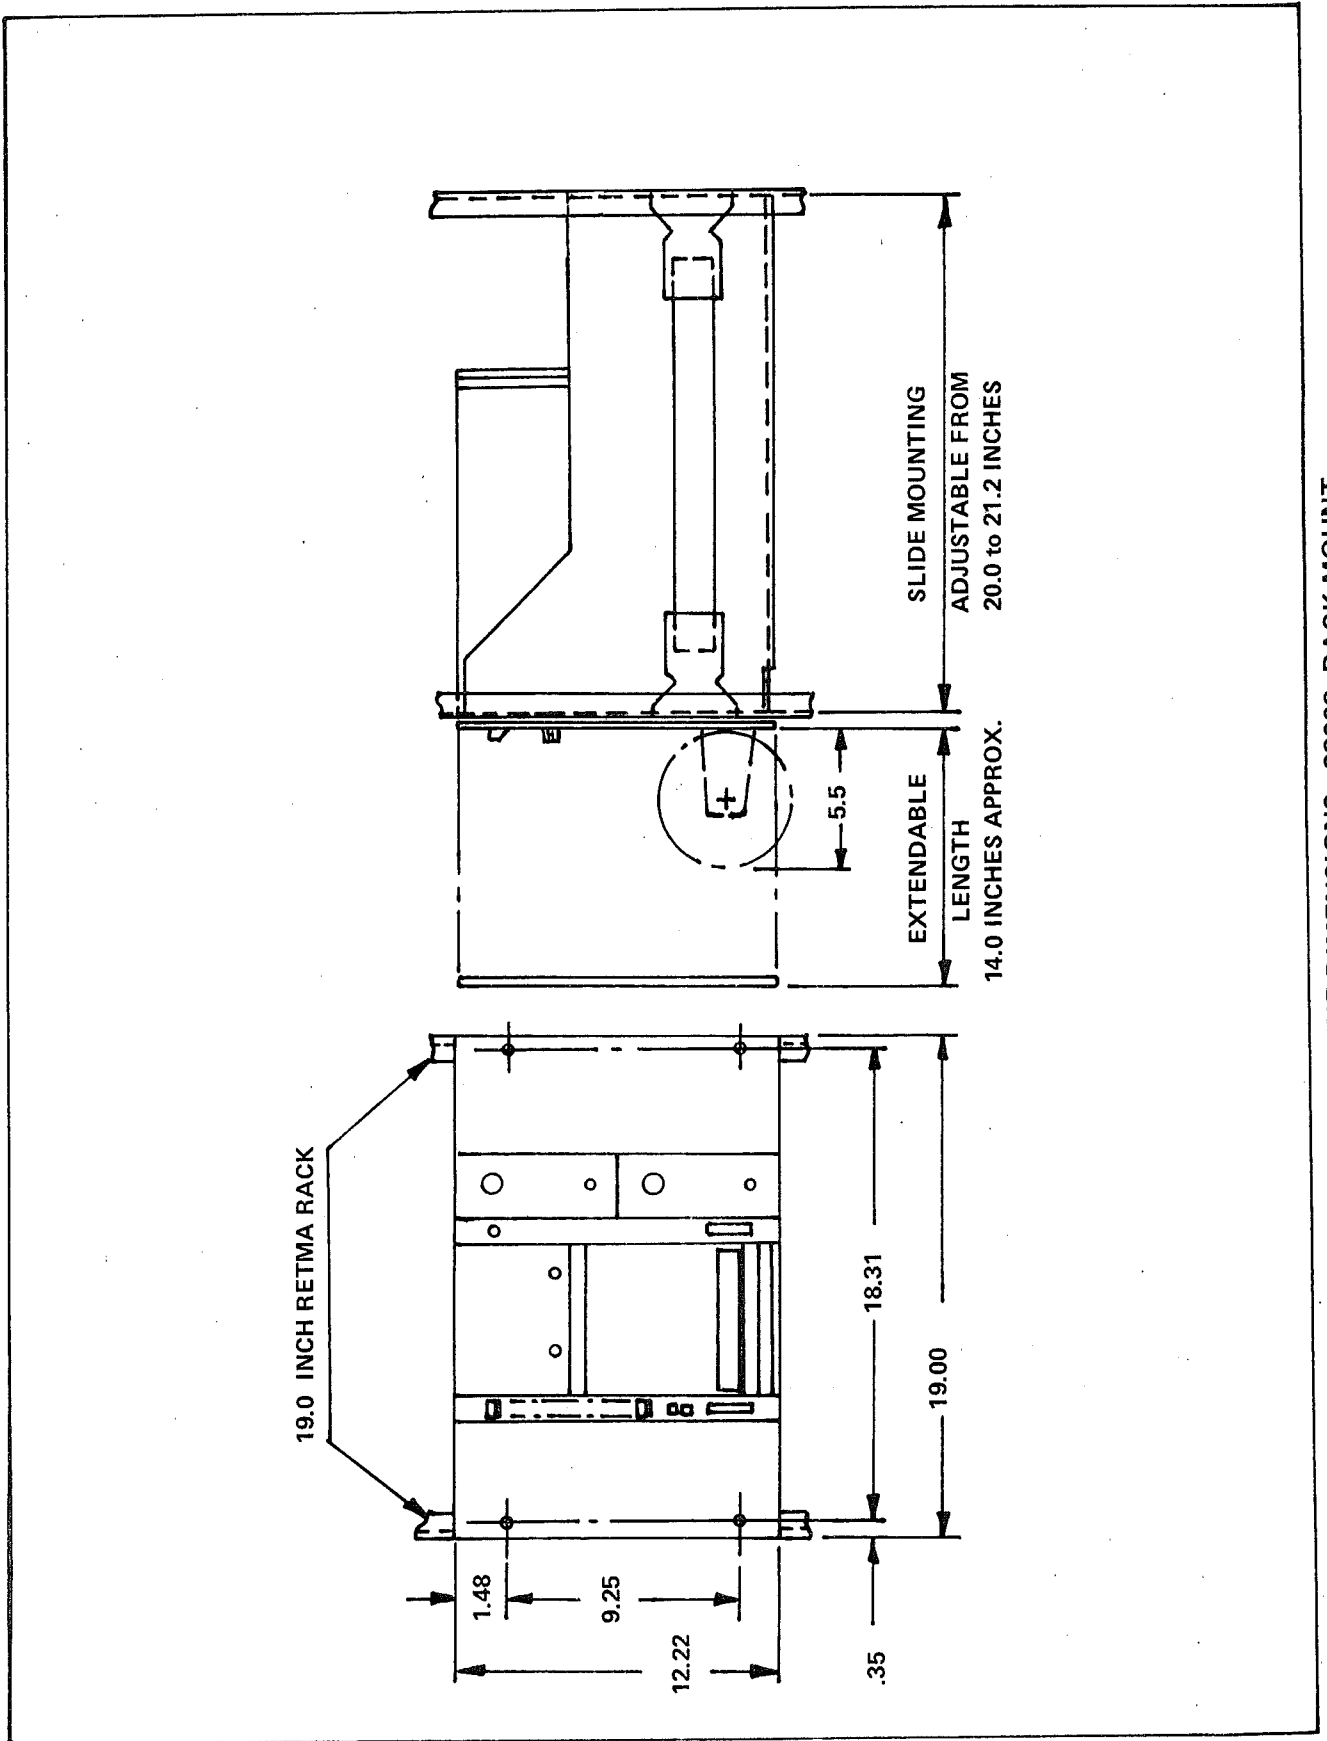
OUTLINE DIMENSIONS - 2200S RACK MOUNT
